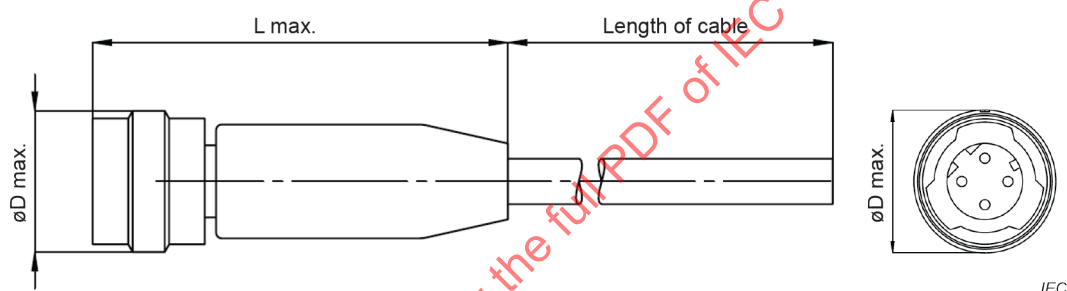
Style LF_M12_PPI – Non-rewireable connector, with female contacts, straight version, with inner push-pull and screw locking
